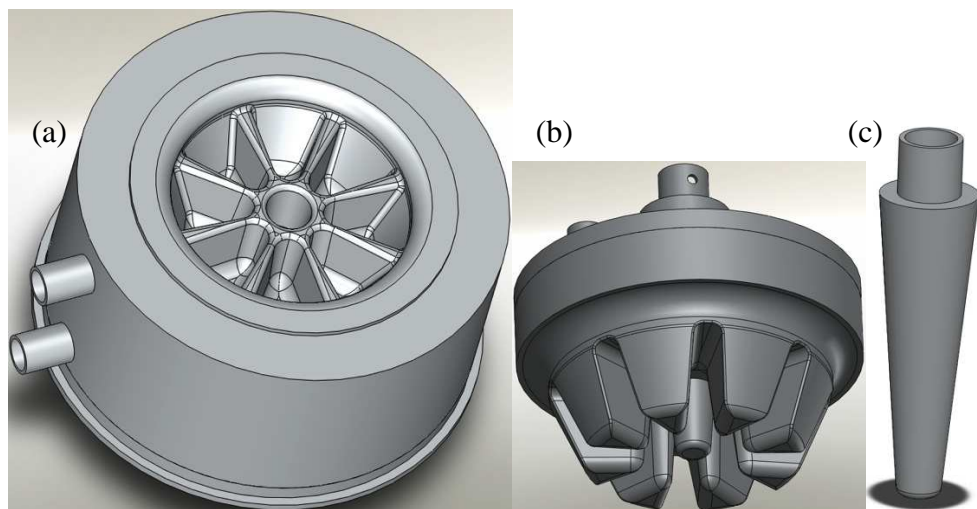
CAD assemblies and parts of Kart Wheel mould (a) female mould (b) male mould and (c) pin.
